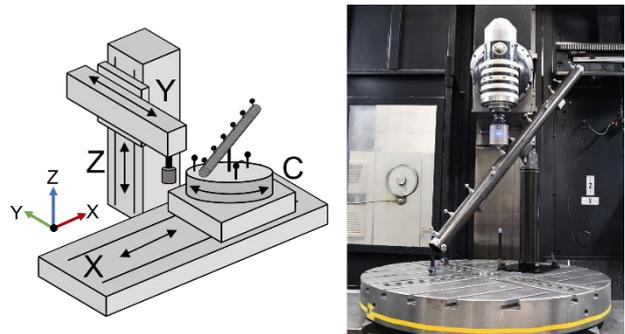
Machine and measurement system, with 1500 mm long ball array artefact. Left part shows a schematic view of the machine and the measurement setup with indicative sphere positions. Right part shows the actual setup, with ball #5 of the ball array being measured (numbering the balls from bottom to top).
